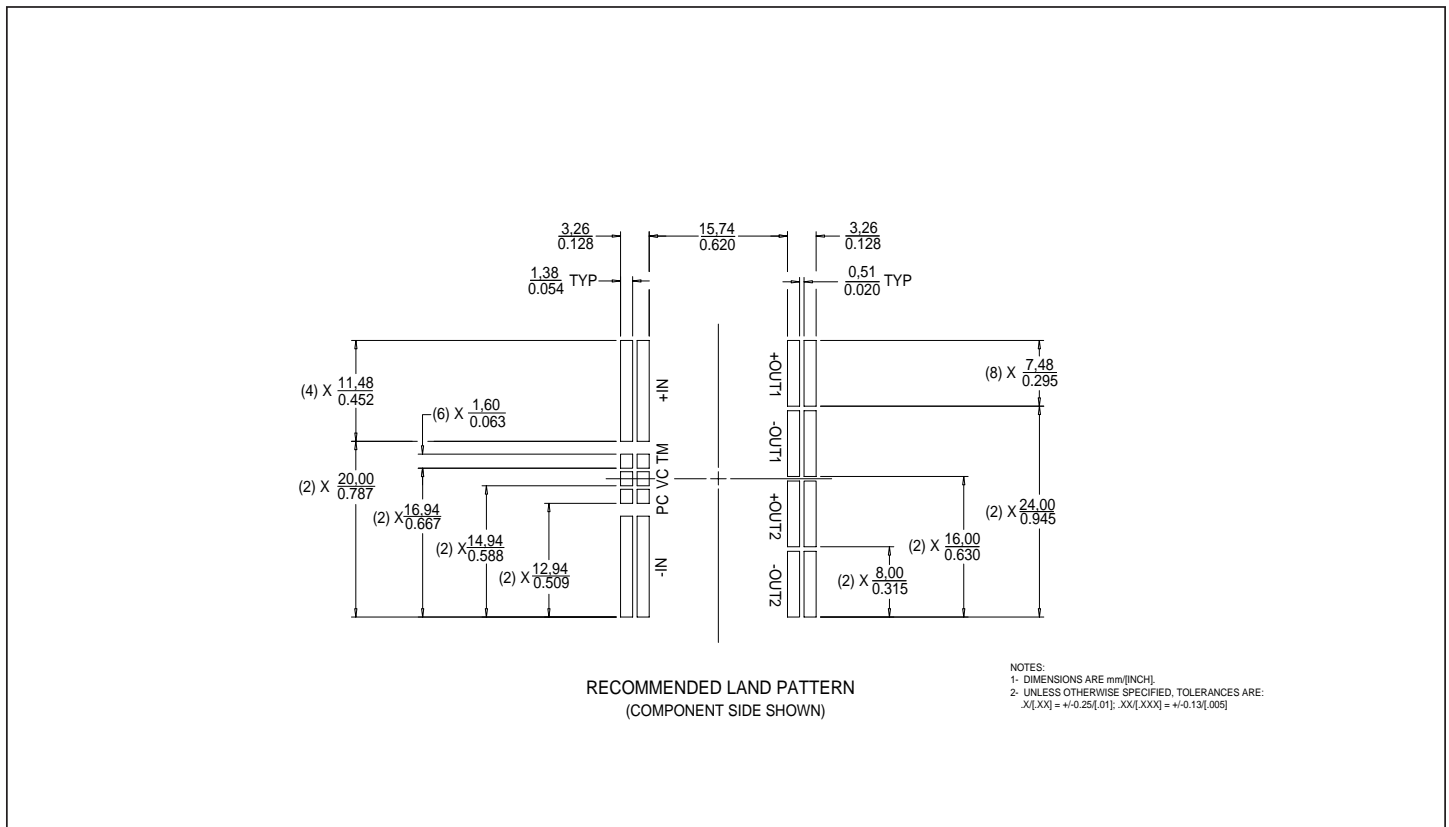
VTM J-lead PCB land layout information; On-board mounting
